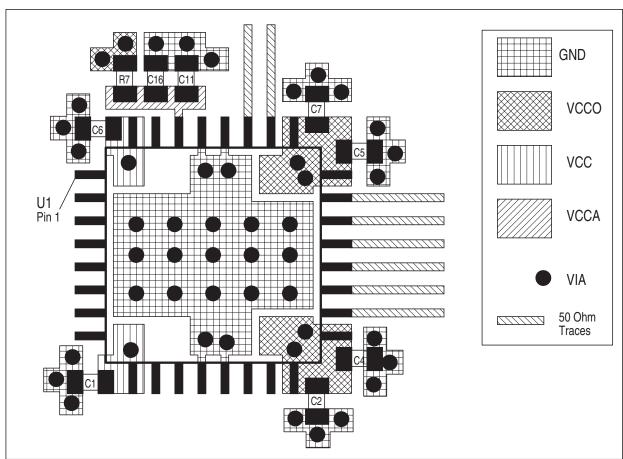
PCB BOARD LAYOUT FOR ICS8634-01
